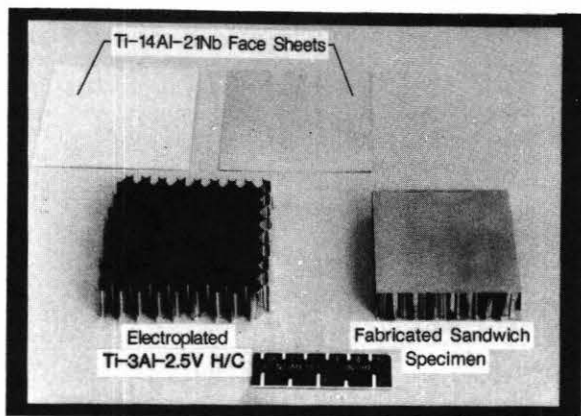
Honeycomb-core sandwich components and fabricated specimen.
